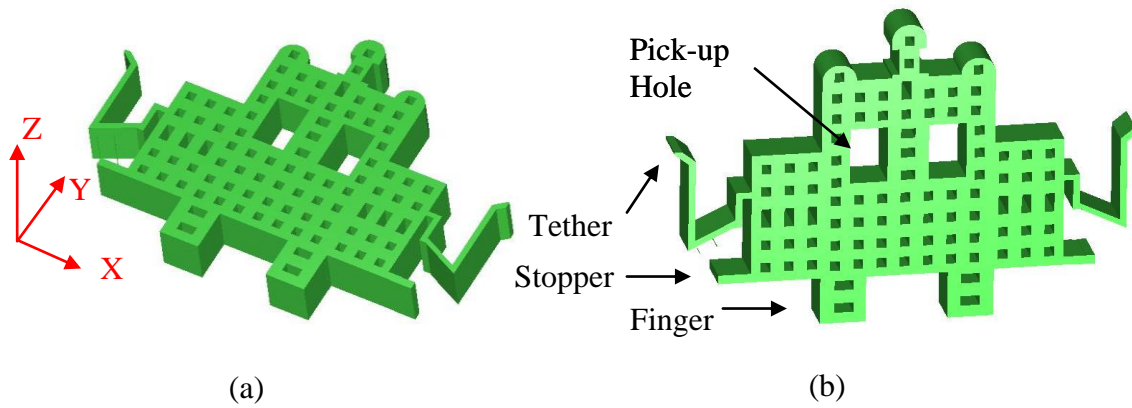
The schematic drawings of the micropart (a) before assembly and (b) after assembly.
